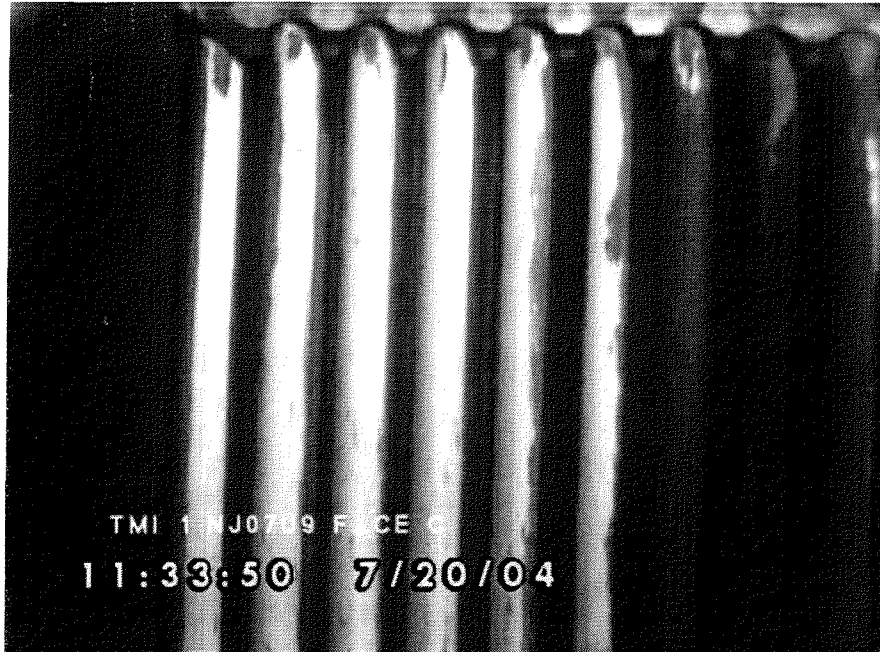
Photograph of Assembly NJ07U9 Third Grid Span
